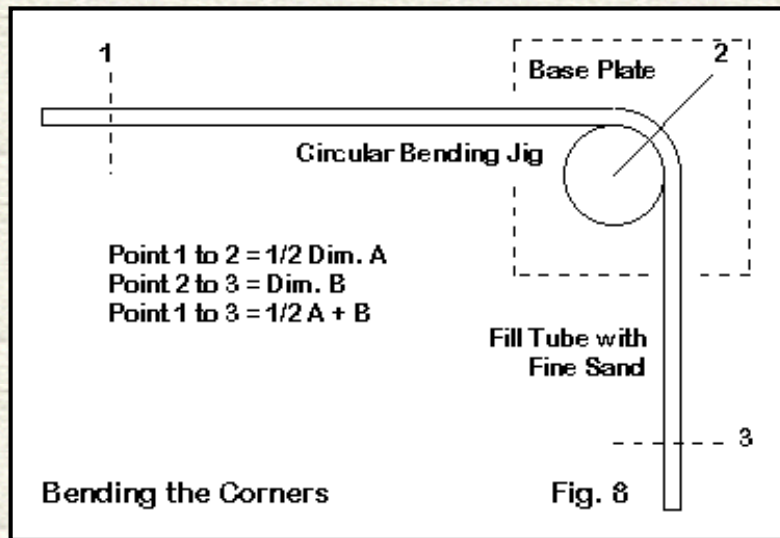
shows a simple jig: a circle mounted on a base plate. The circle can be cut from plywood or be a pulley wheel. For larger radius bends, I have used such materials as a worn-out power mower wheel.
